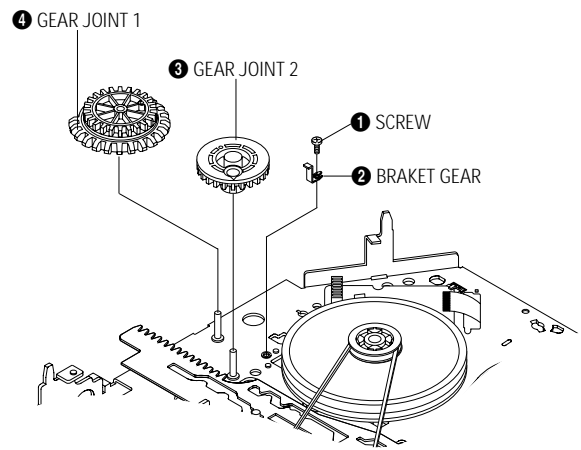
Bracket Gear, Gear Joint 1,2 Removal
